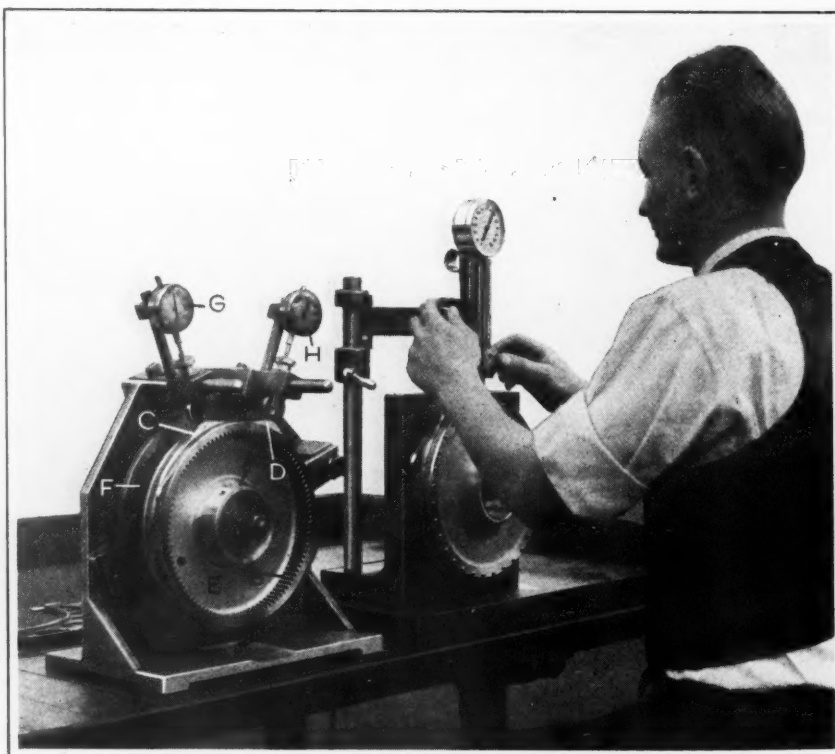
Applying the Scleroscope Hardness Test to Cam Surfaces; the Fixture to the Left is Used for Testing the Concentricity and Angular Spacing of the Cam Lobes
